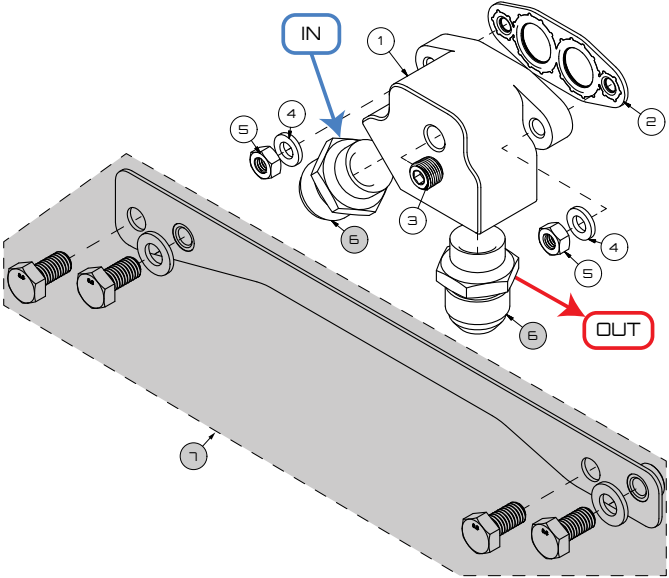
GTO / Commodore Assembly, Parts & Plumbing
